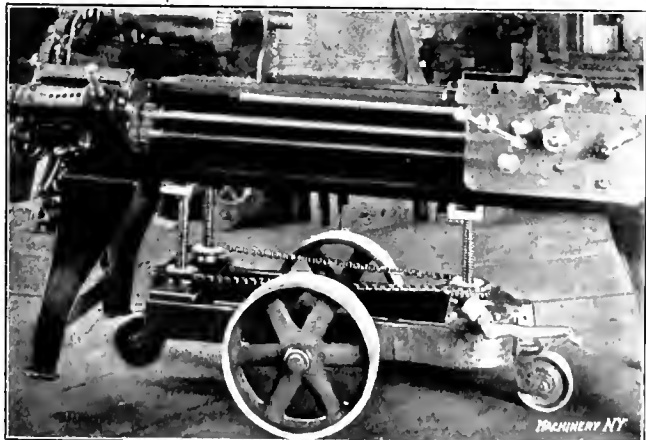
An Elevating Truck for Raising and Moving Lathes
